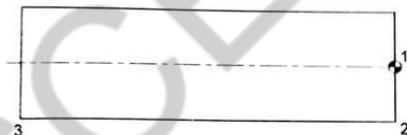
Tool positions for turning the billet to 100 mm diameter The depth of cut per place
